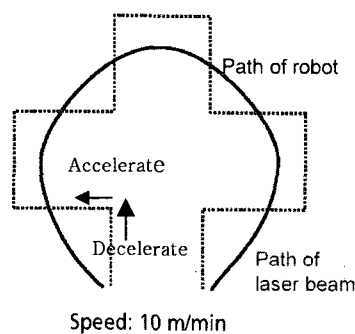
Trajectory of robot and required pass (Courtesy of Dr. E. Beyer)
